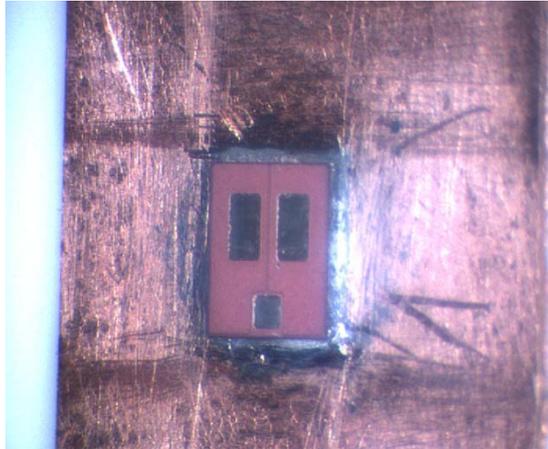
A DirectFET soldered to alumina DBC for solder thickness test.
